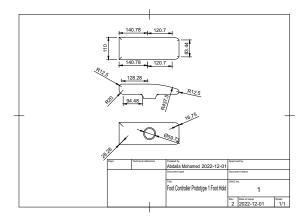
Foot Controller Prototype 1 Foot Hold Technical Drawing
